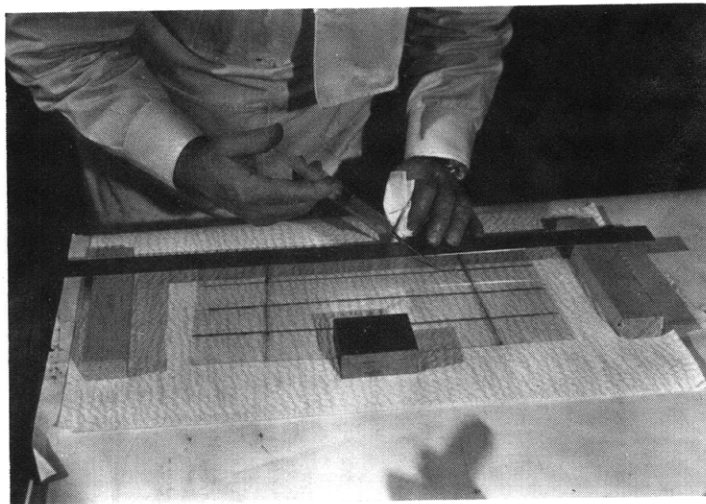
Application of Epoxy Bead to Main Deck Plating
